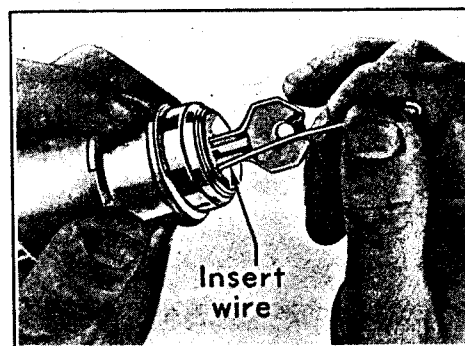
With the plunger of an ignition or tire lock cylinder depressed by inserting a wire in the hole of the cylinder, turn the key clockwise and pull outward to remove the cylinder.
